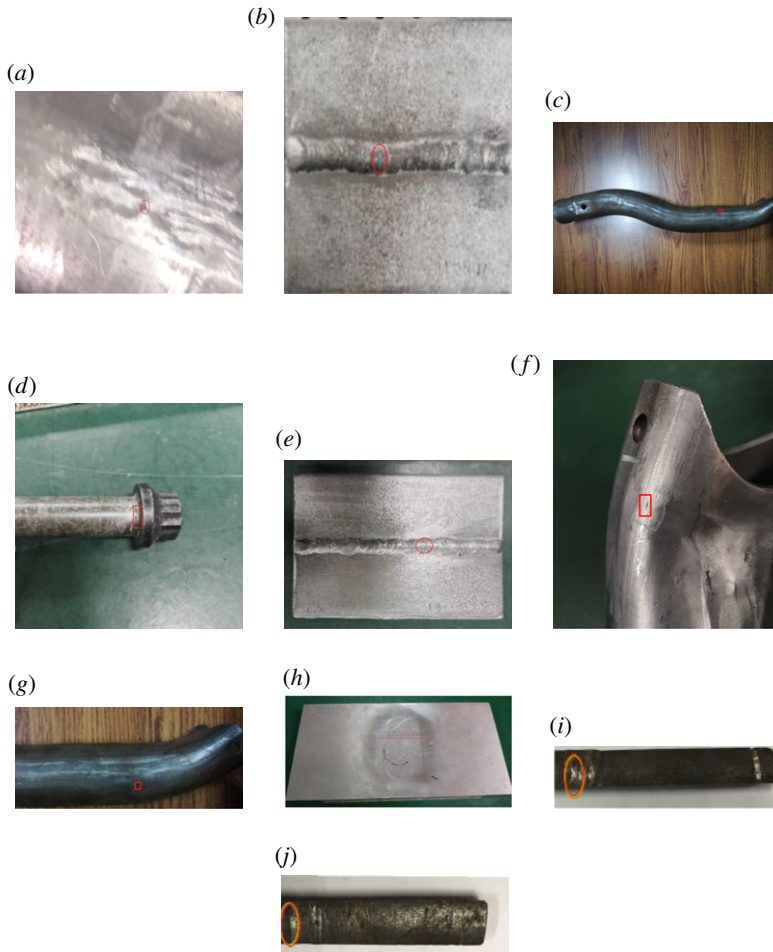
Defective specimen objects corresponding to figure 5. (a) pipeline1, (b) weld joint1, (c) pipeline2, (d) Axel, (e) weld joint2, (f) low-carbon steel, (g) pipeline3, (h), stainless steel, (i) weld joint3, (j) weld joint4. (Online version in colour.)
